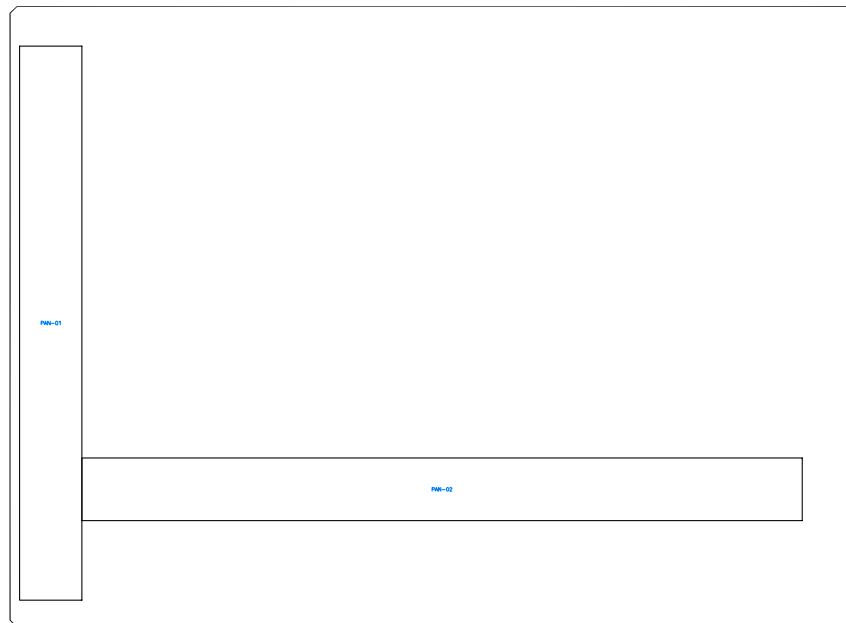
PAN-02 DIN Rail inserted in the drawing
